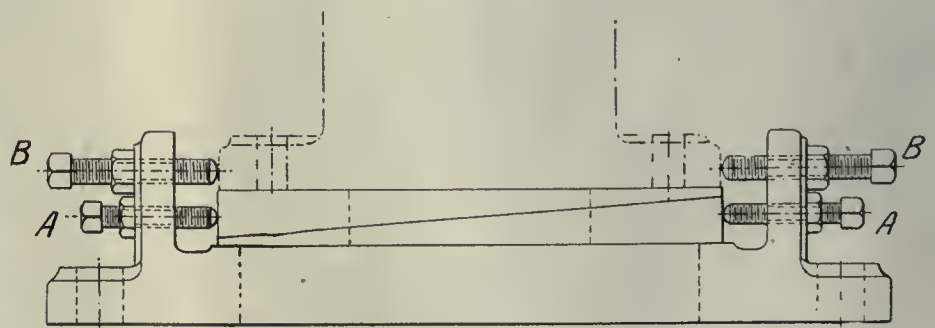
WEDGE-ADJUSTING SOLE PLATES.
